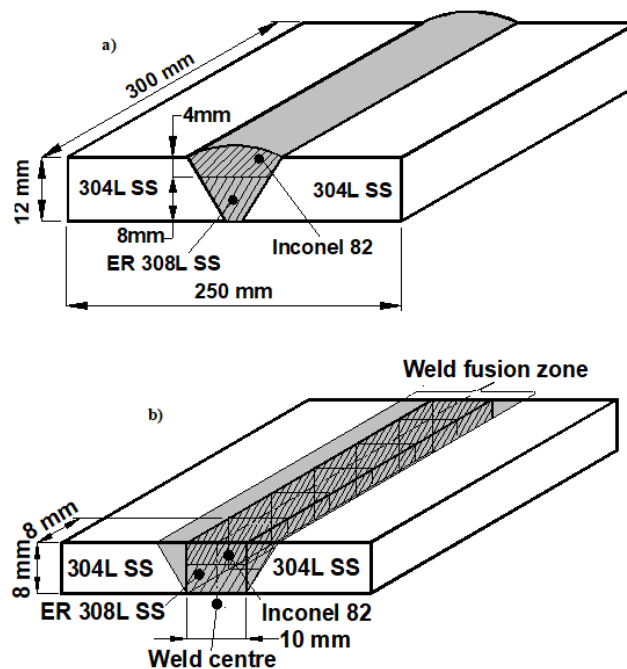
(a) 304L SS weld pad fabricated by joining two 304L SS plates using 308L SS filler wire (8 mm deposit) and Inconel 82 filler wire (4 mm deposit over 308L SS); (b) depicts 10 mm (wide) × 300 mm (length) × 8 mm (height) sectioned out from the fusion zone of the weld pad and further 10 mm (wide) × 8 mm (height) × 8 mm (length) specimens incised from the weld fusion zone
